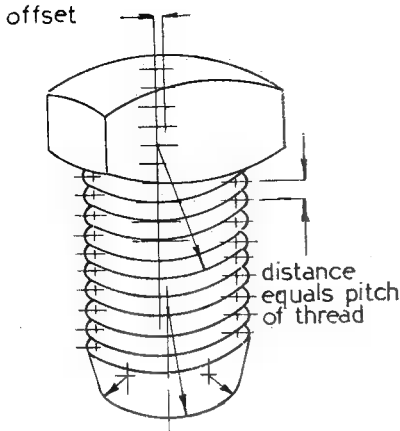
Illustrating the constructional method of drawing screw threads isometrically
